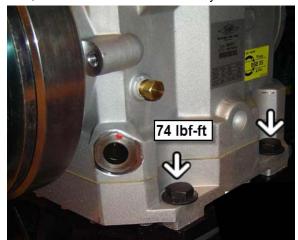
MOUNTING BOLTS TORQUE – 4 BOLTS
